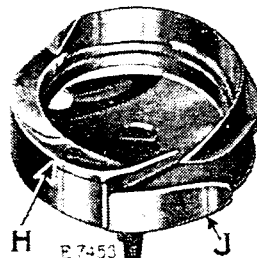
Sewing Hook Removed from Machine, Showing Needle Guard Washer
